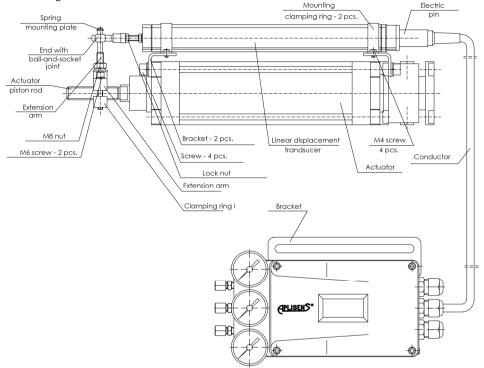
Assembly of the APIS-101-... and APIS-201-... positioner with linear actuator of one-sided and double-sided operation.
